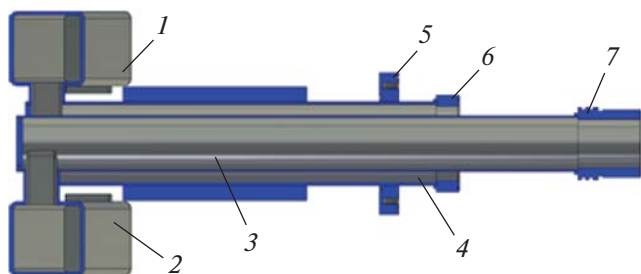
Layout of water collector and its main elements. (1) Inlet receiver collector, (2) outlet receiver collector, (3) outlet pipe, (4) inlet pipe, (5) vacuum–atmosphere decoupling flange, (6) connecting flange to the inlet line, and (7) connecting flange to the outlet line.
